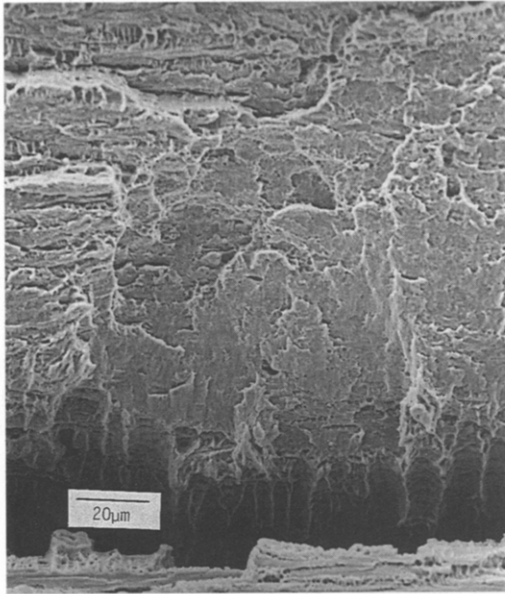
Shear failure of the sloping wall of a large serration in the fracture surface of specimen H850-E9.
